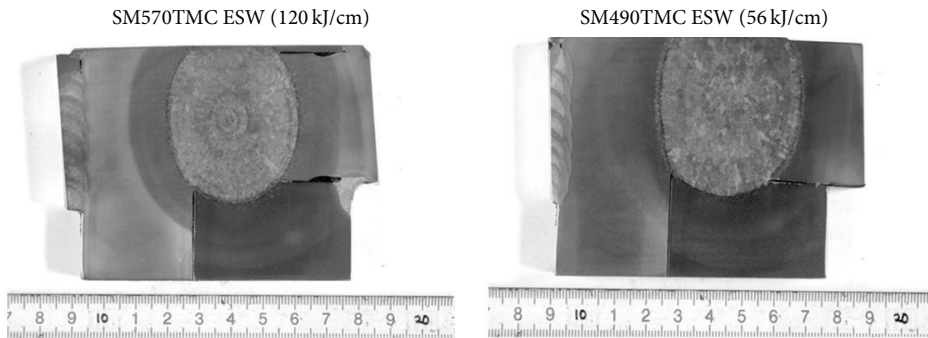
Macro test result of ESW welding for SM490TMCP and SM570TMCP.
